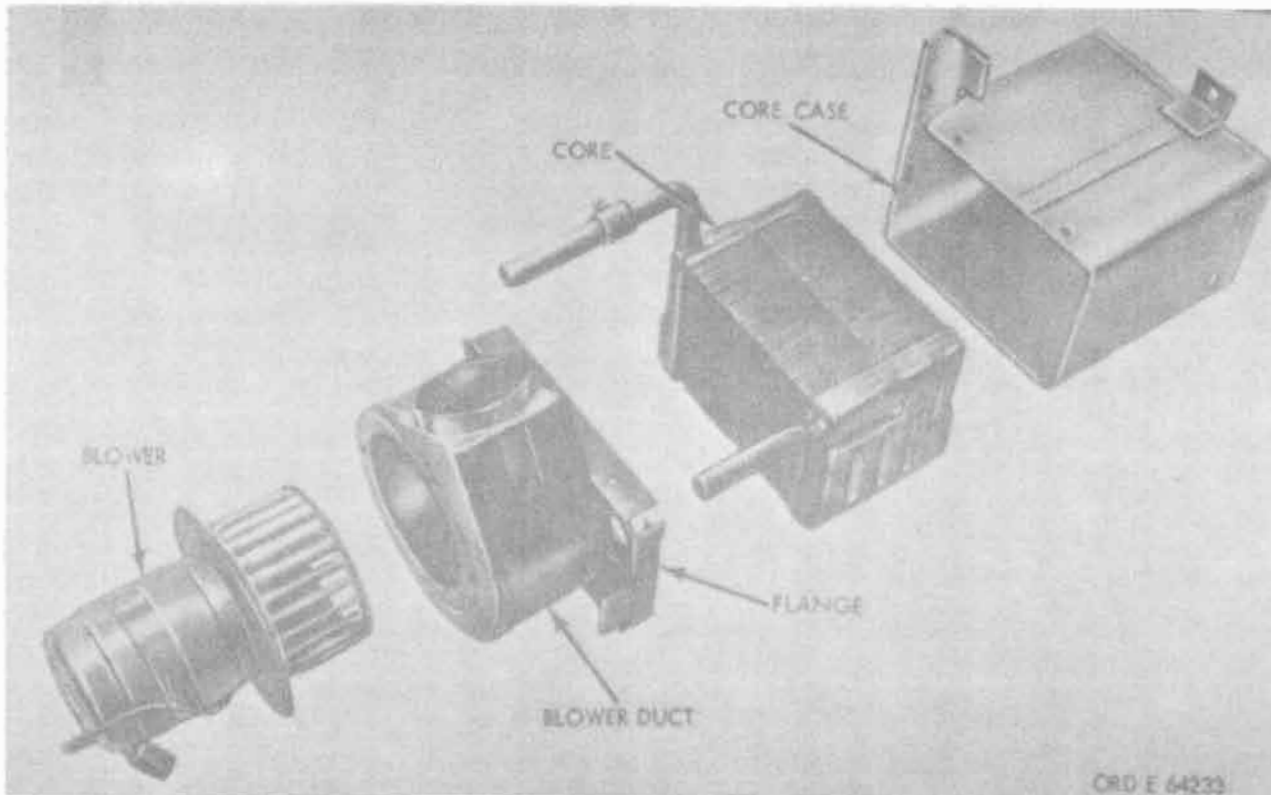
Heater assembly (-25°F.) major components—exploded view.
